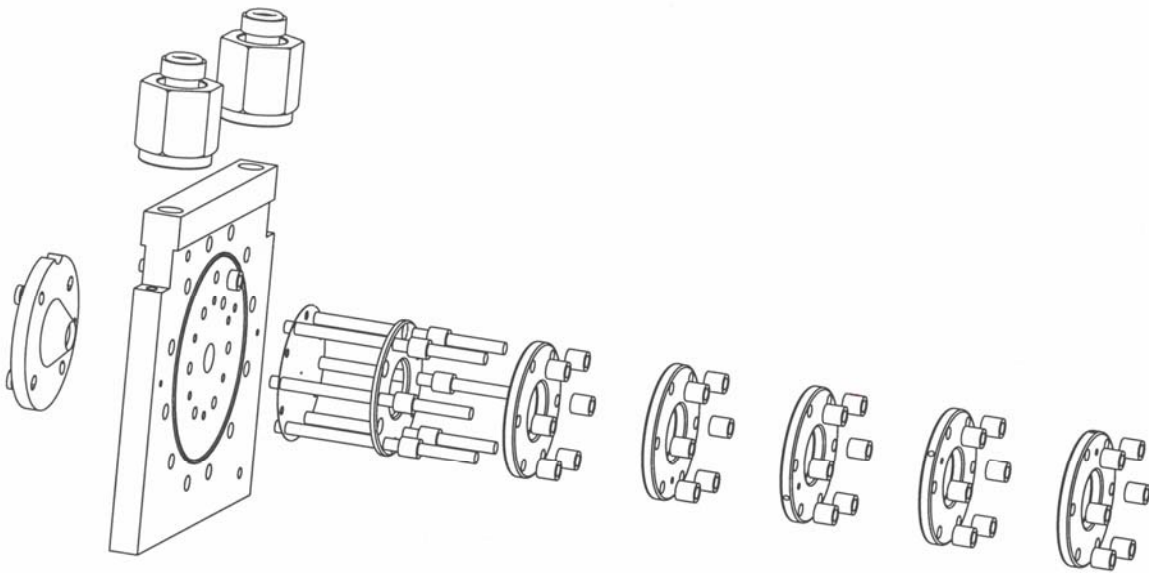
This is a simplified view for the mounting of the copper rings, the ceramic spacers and the trapping lens to the end cap.
